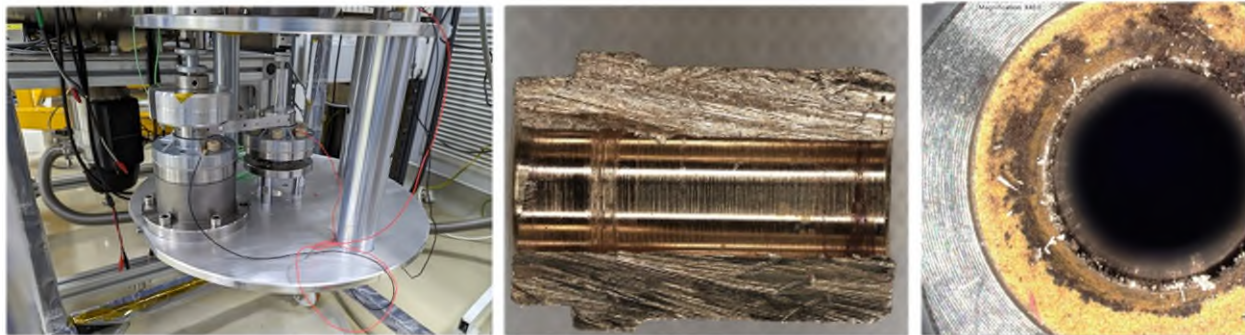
Vacuum test rig for bushing and axial seal evaluation (left), early bronze bushing failure (center), axial seal after 10,000 revs in air (right) with some bronze debris embedded at inner interface
